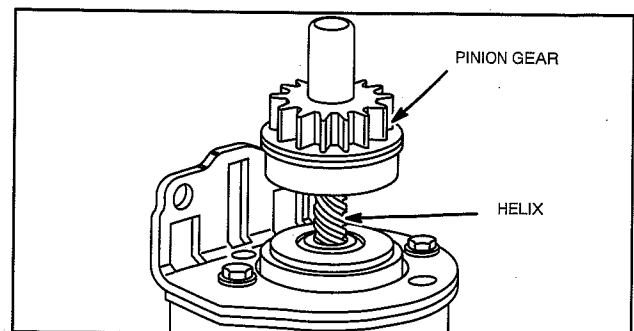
Checking Starter Motor Drive Steel Pinion
